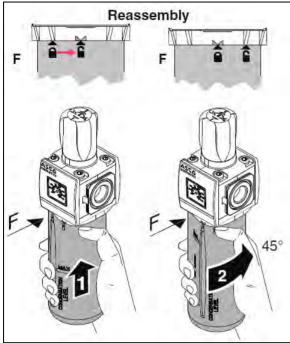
ACCESSORY AIR FILTER BOWL INSTALLATION
